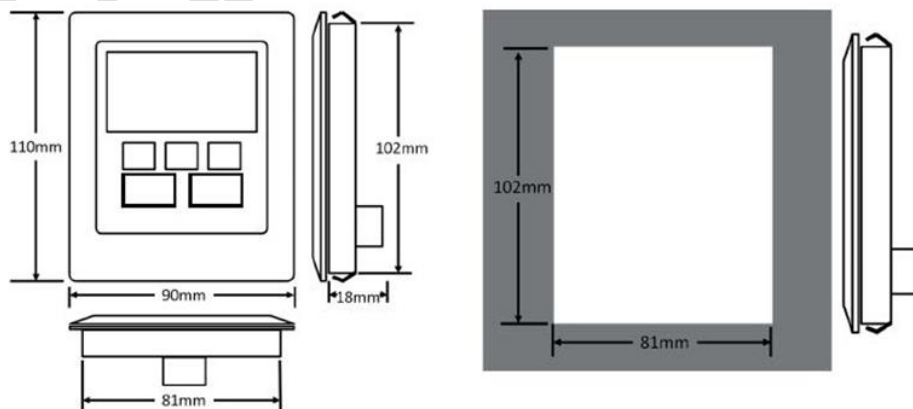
Cutouts Required for Panel Mounting OLED A Keypad
